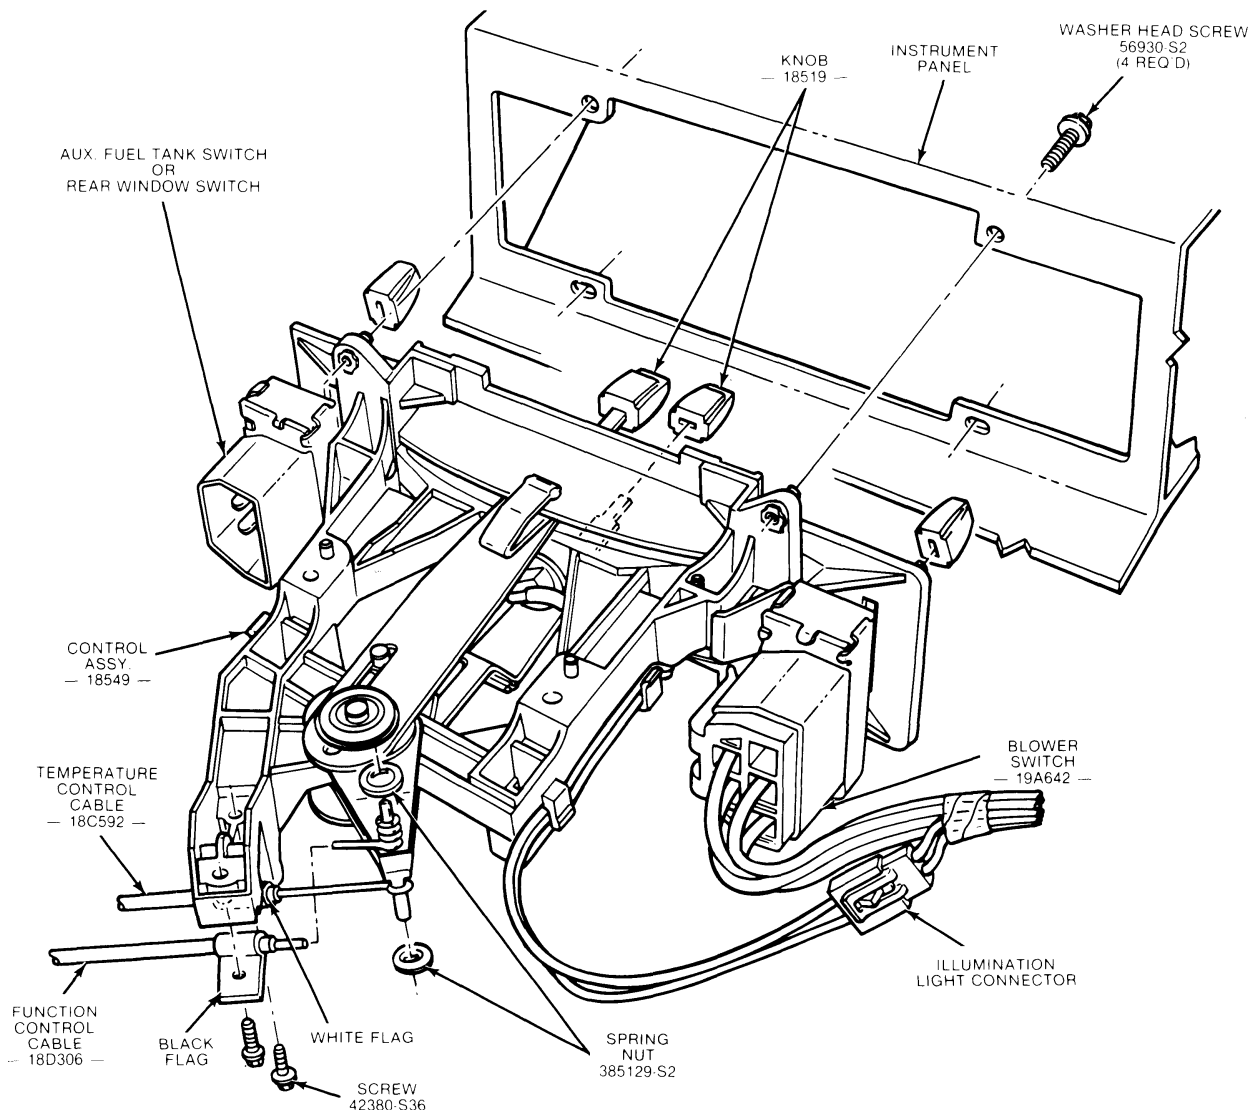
Standard and Hi-Output Heater Control Assembly Removal
